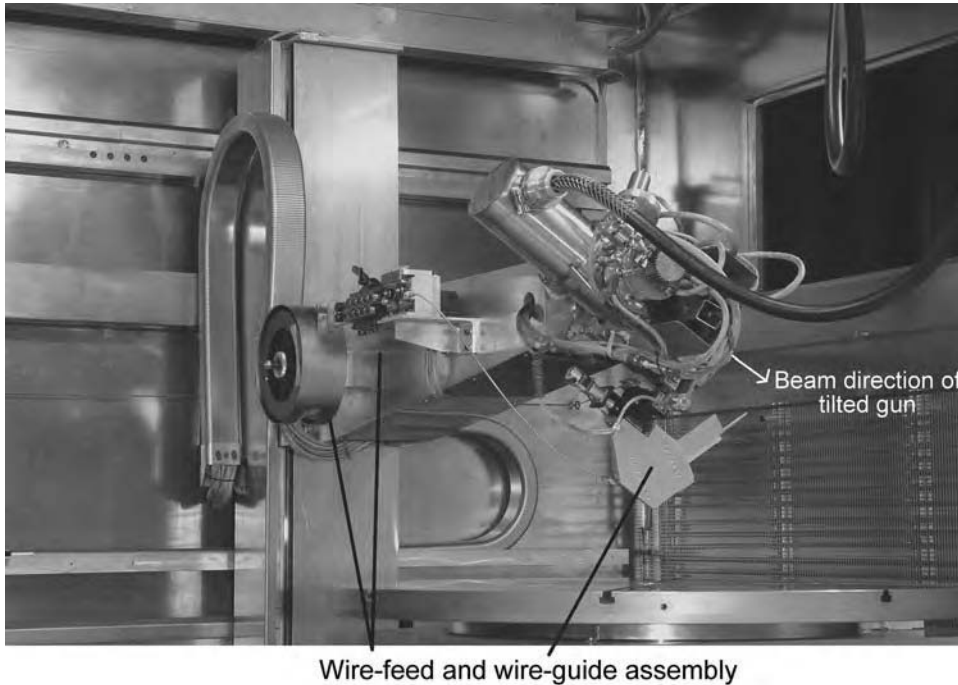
Moveable electron beam welding gun assembly with wire-feed system. Courtesy of Sciaky, Inc.
